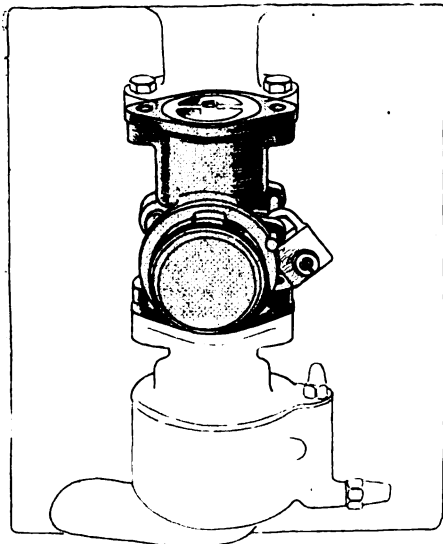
Kramer self-contained engine governor, which is placed between the carburetor and the intake pipe
